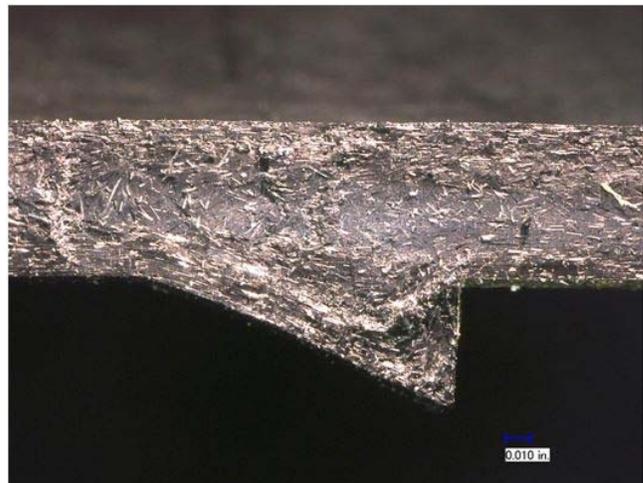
Photomicrograph showing a typical area on the failed connector fracture surface.
